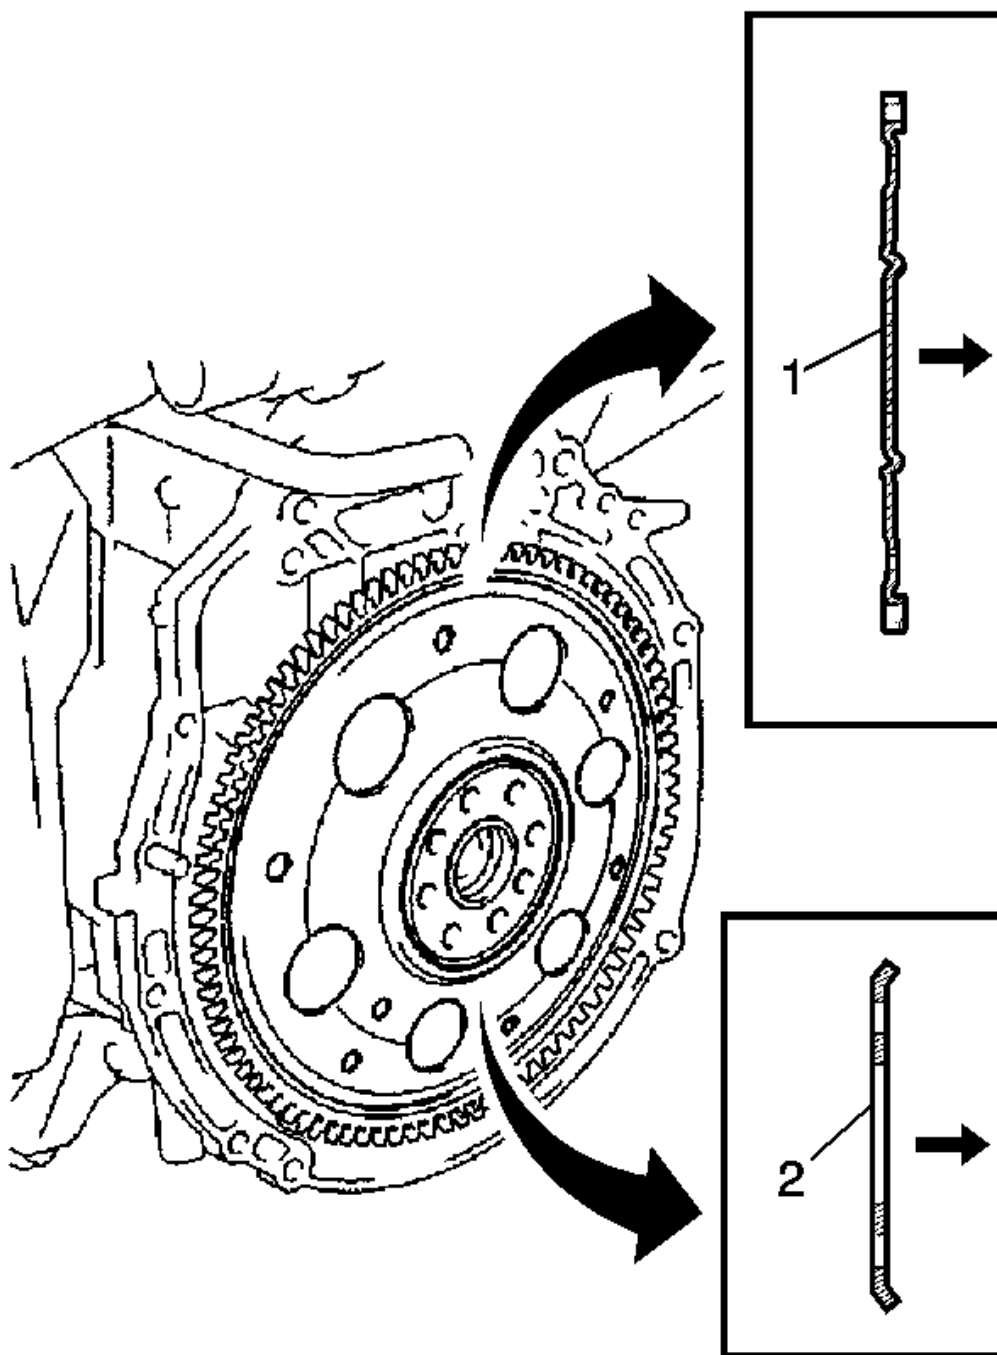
View Of Drive Plate & Rear Drive Plate Spacer
